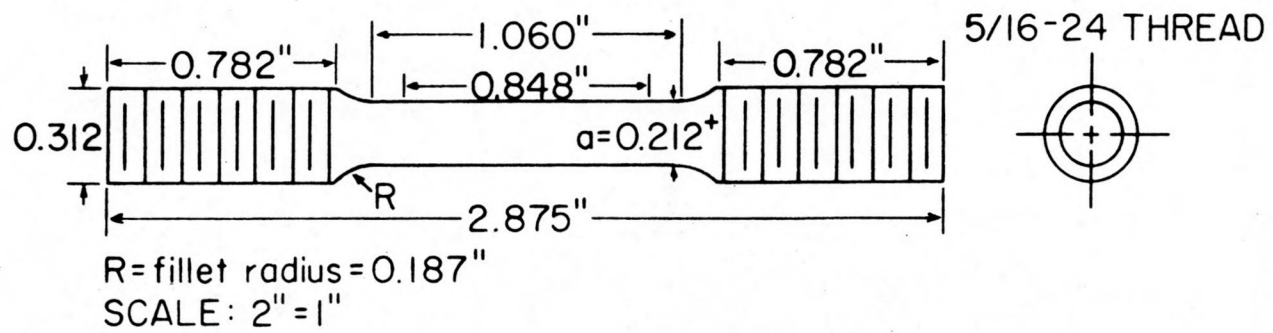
A387 Smooth-Bar Tensile Specimen.
